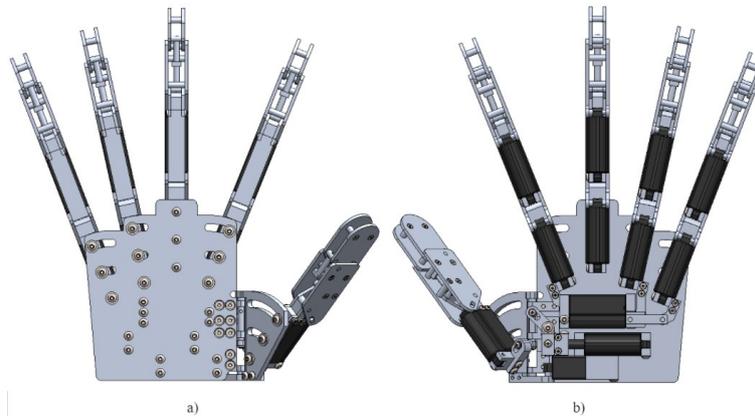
The designed hand in CAD with the fingers fully extended from (a) a ventral view and (b) dorsal view.
